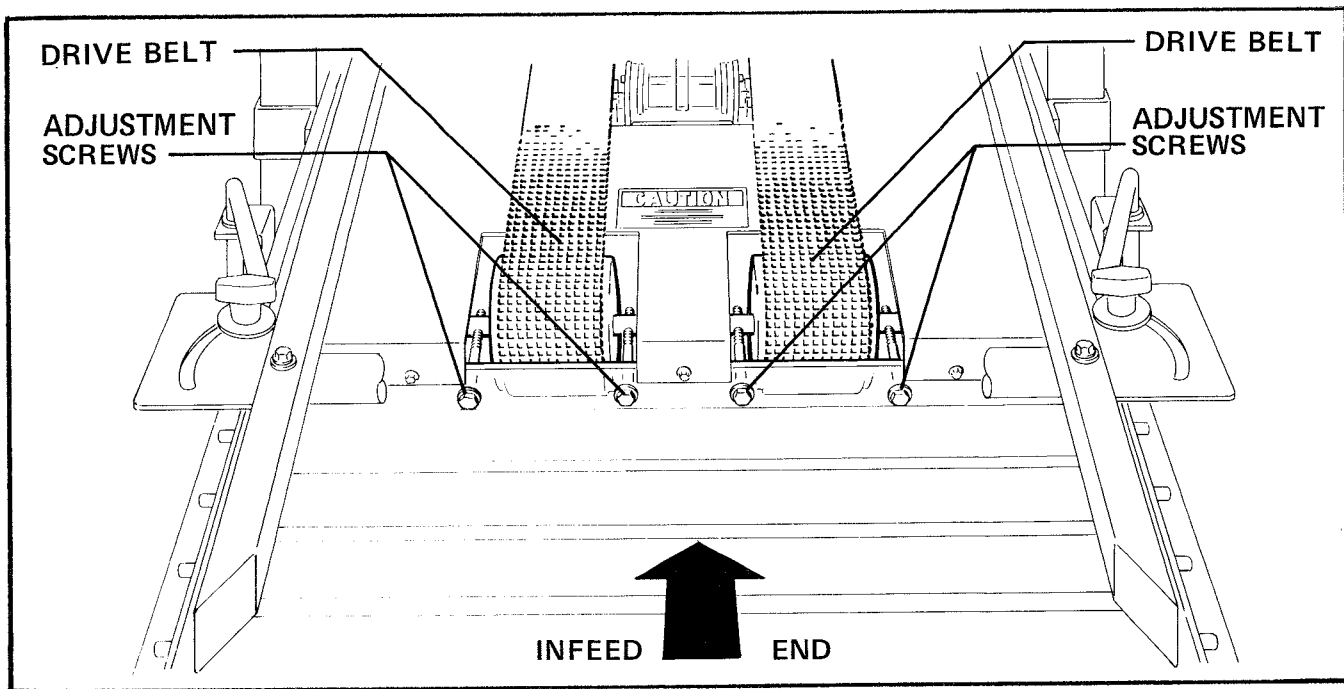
BOX DRIVE BELT TRACKING ADJUSTMENT.
